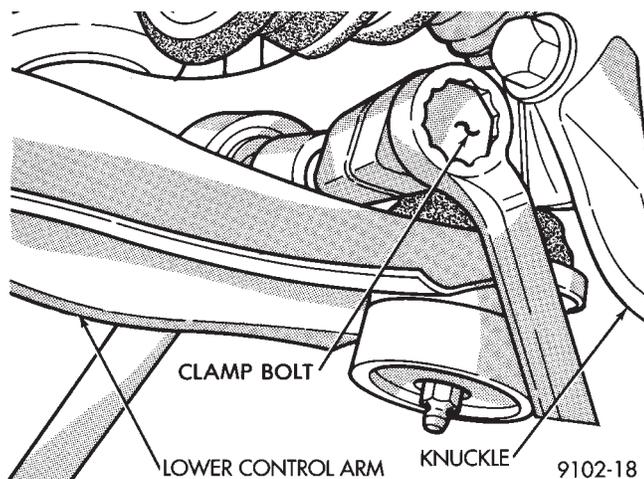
Tighten Steering Knuckle Clamp Bolt
